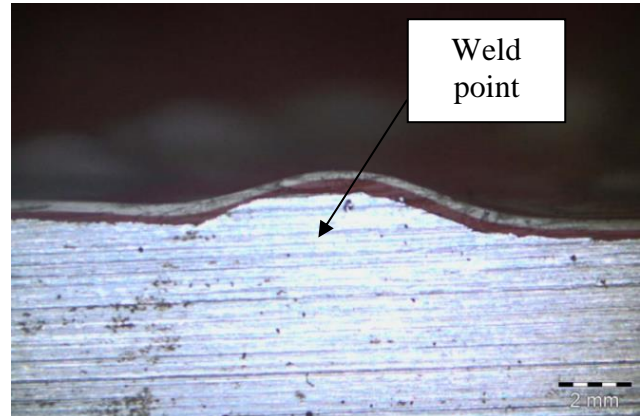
Cross section of specimen 6A (Ribeiro Filho, 2018).
